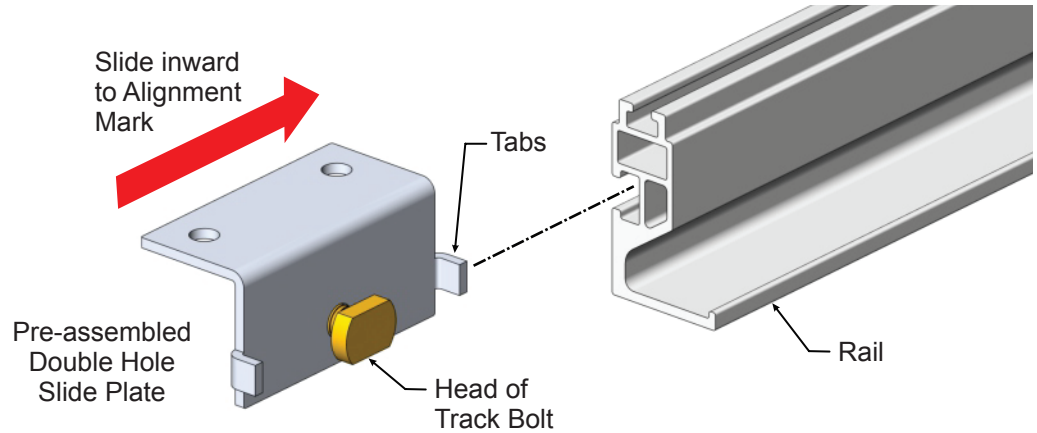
Installing and Aligning a Double Hole Slide Plate
